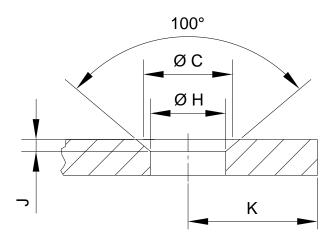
Hole geometry (Geometry Code R5) and dimensional requirements for installation of ASNA2065 crimped nuts to AIPS01-02-027 (Hole tolerance Code F3)
